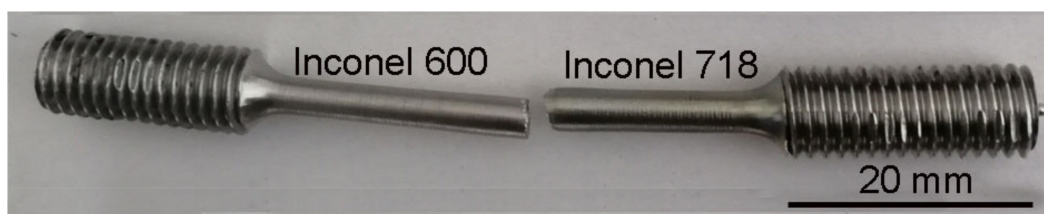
Failure location of the transverse tensile specimen corresponding to the dissimilar Inconel 600/Inconel 718 friction welded joint.
